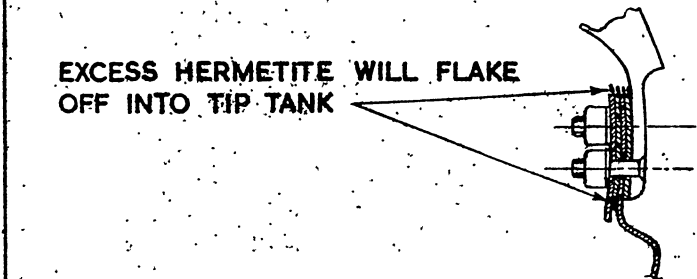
Pt.136 attached shows typical examples of how excess solidified jointing can flake off into fuel tanks. Sketch No.3 of the drawing shows the correct application of the jointing compound to a typical surface.
